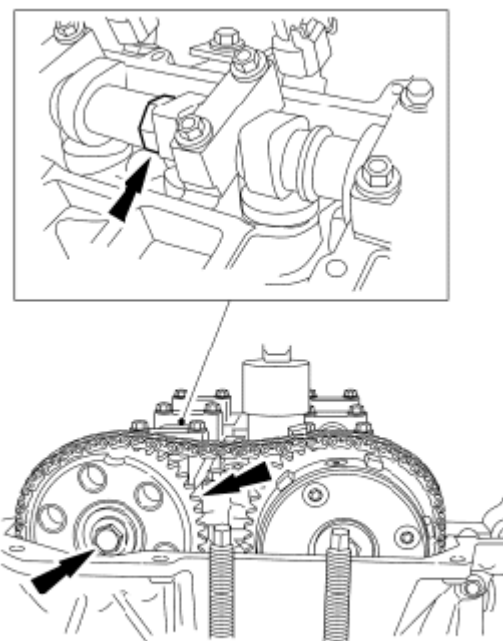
Locating Flats On Camshaft To Prevent Camshaft Rotation
